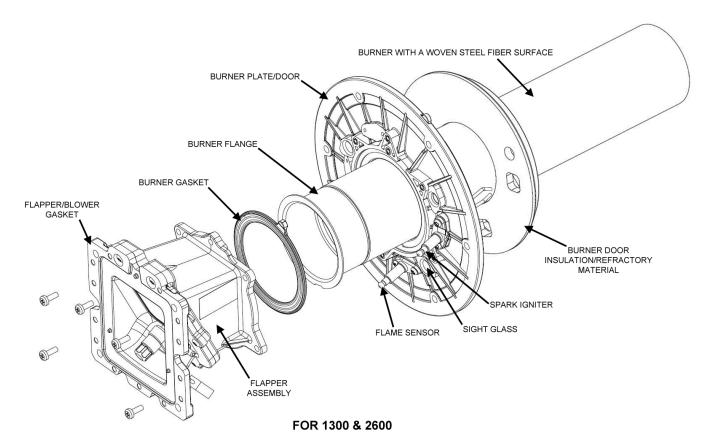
BURNER ASSEMBLY (1300/2600)
